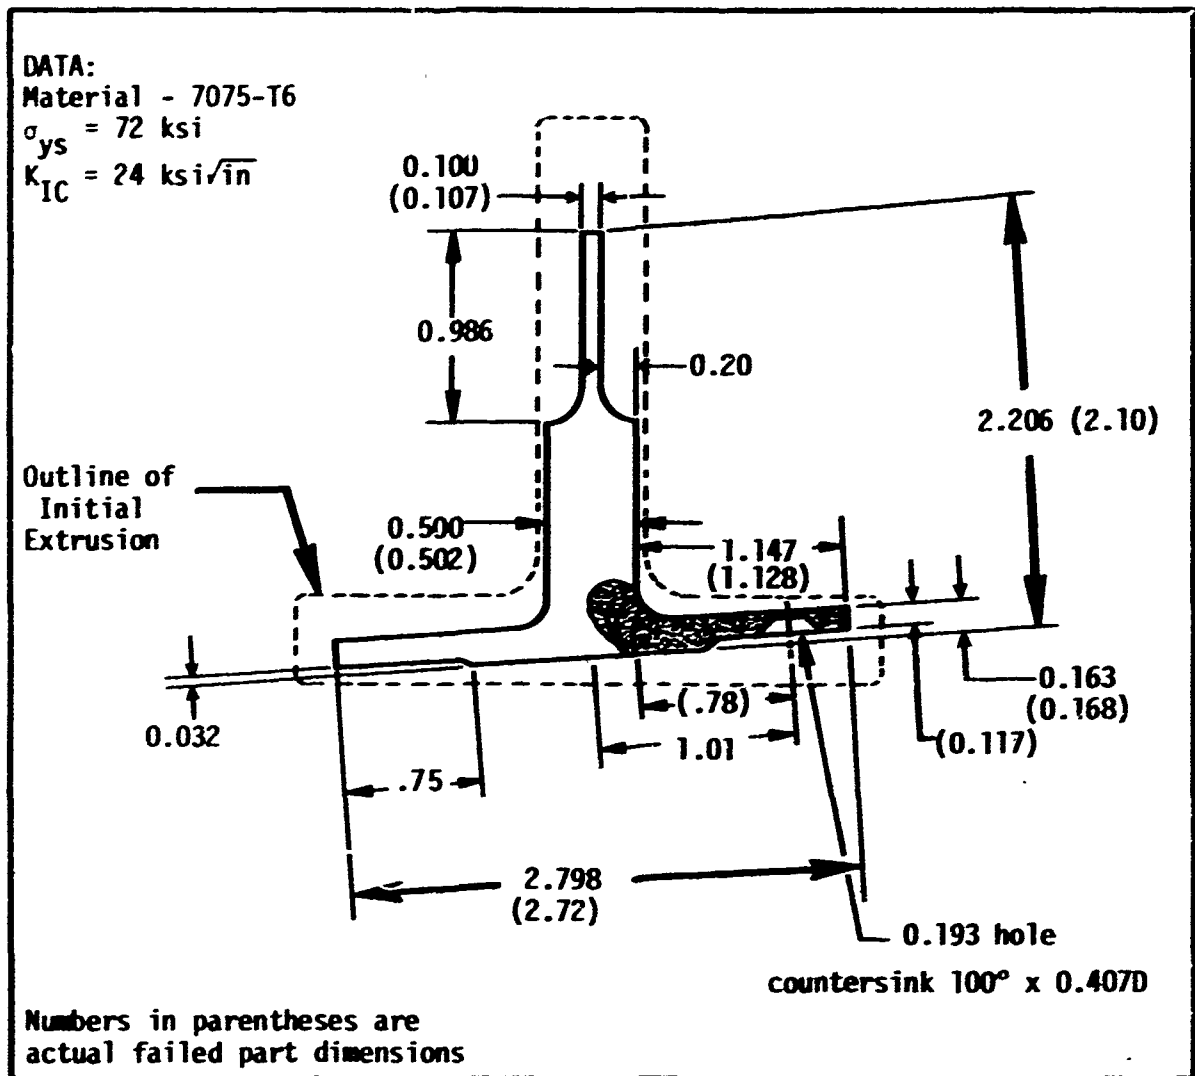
Spar Cap Cross Section Geometry and Fracture Description
